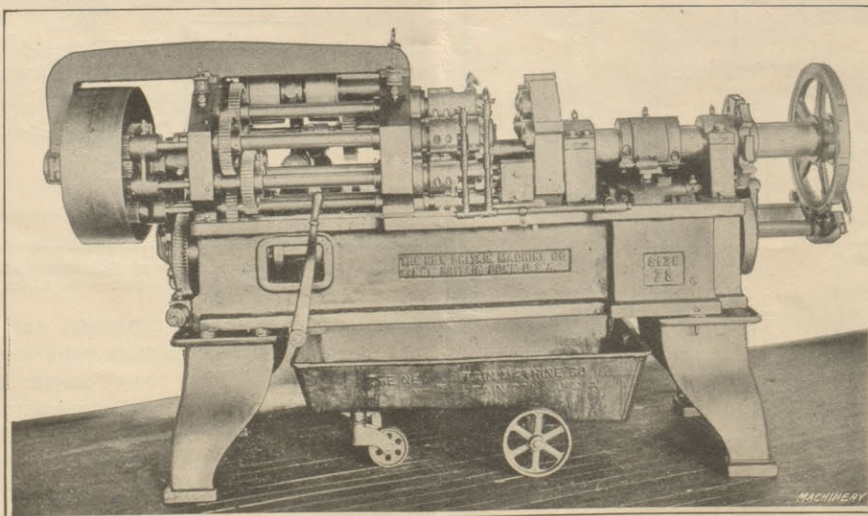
New Britain No. 73 Seven-spindle Automatic Chucking Machine
